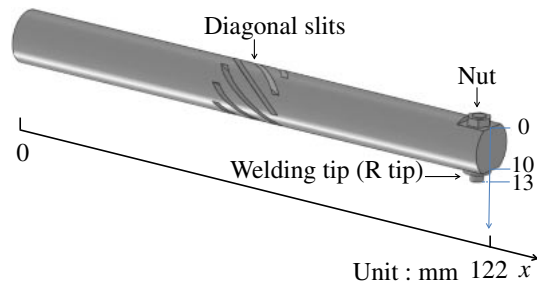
Complex vibration horn with diagonal slits and welding tip.
